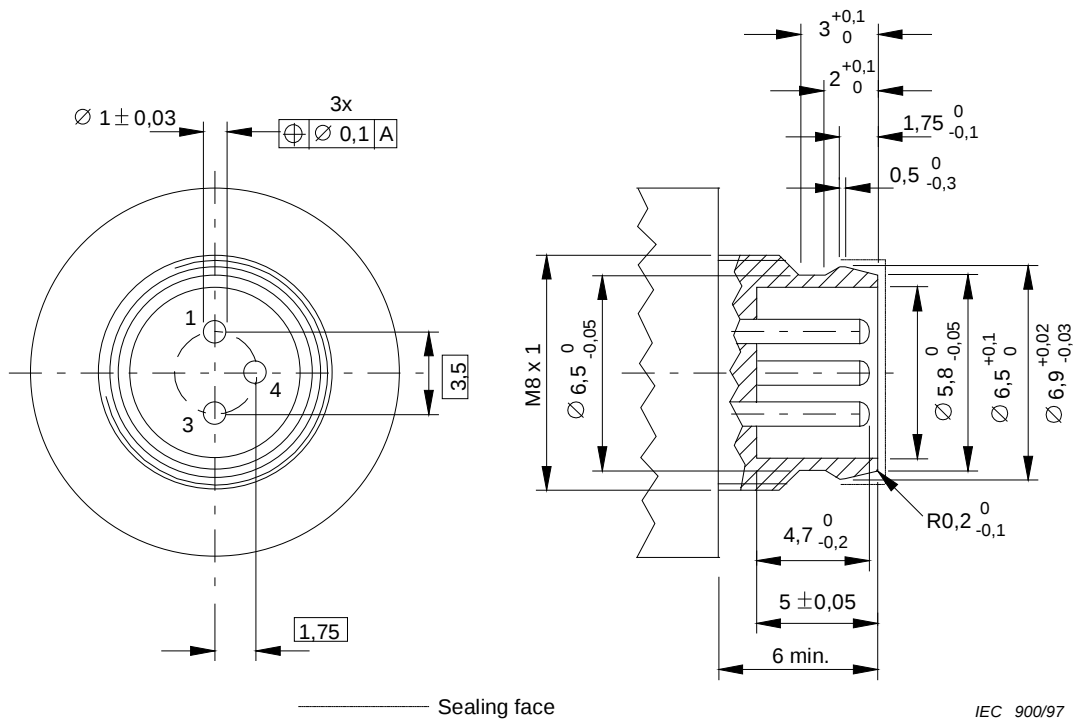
8 mm-~~Ø~~ thread 3-pin integral connector for d.c. proximity switches
